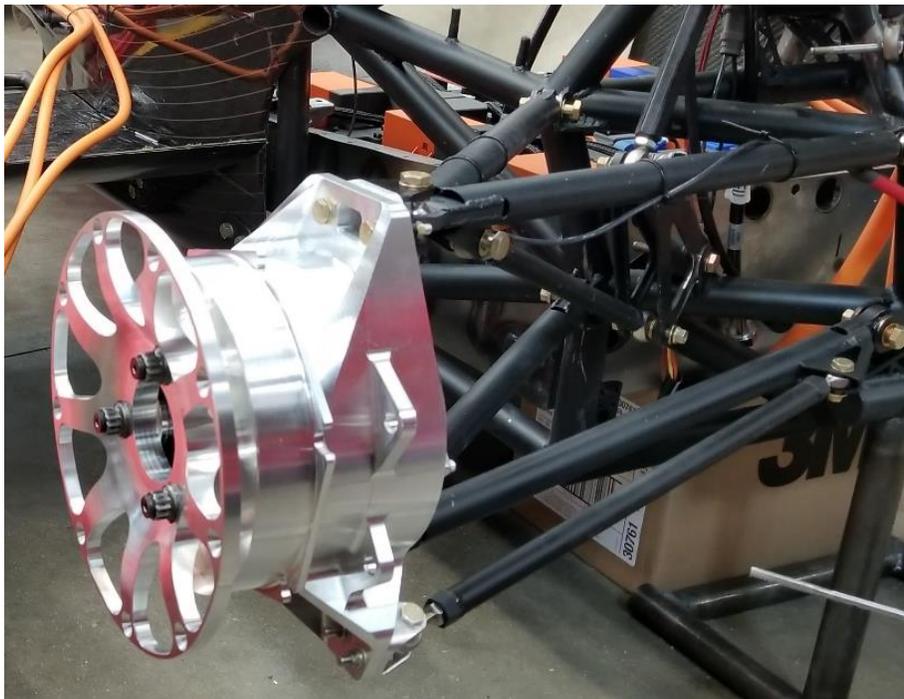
Rear left final corner assembly (without motor) mounted on the car
